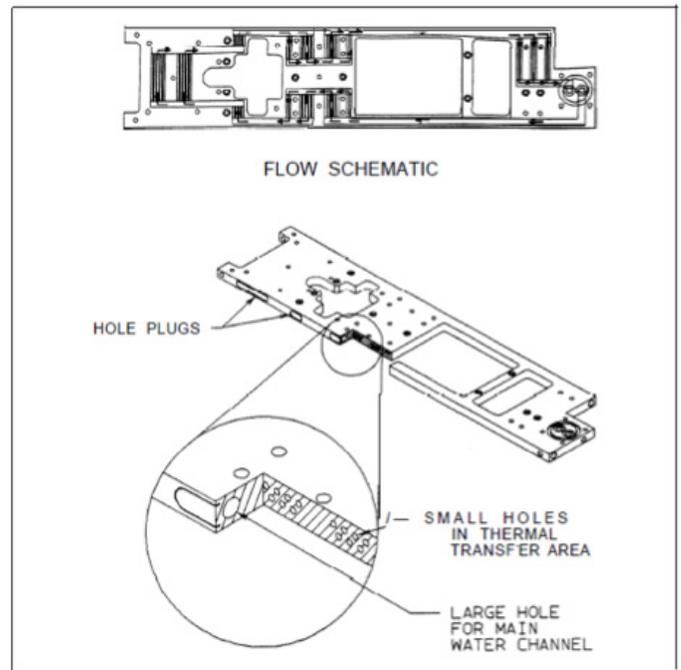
Schematic of the Drilled Hole Cold Plate Design [1].
